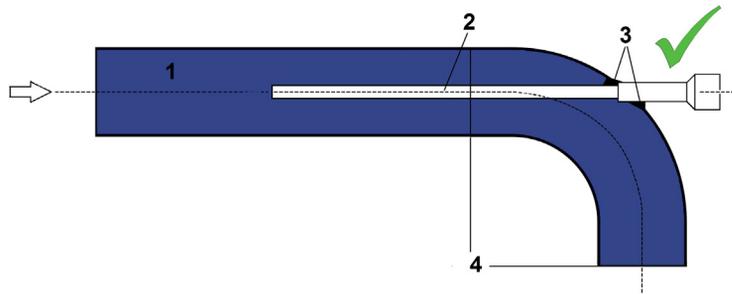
To avoid dead areas, the pocket for the temperature probe (2) may be welded in the product flow (1) through the pipeline. Attention should be given to the quality of the weld (3), which must be smooth and continuous. Welding of the temperature probe into the bend may be done off-line, after which the bend can be built permanently (by welding) or with dismantlable joints into the piping system. In the latter case, the bend section is detachable (4) (Lelieveld et al., 2003; Hauser et al., 2007).
